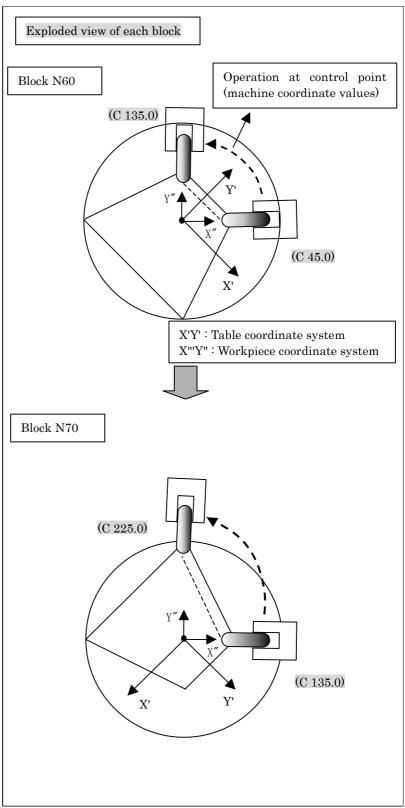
(c) Exploded View of Each Block (1)
